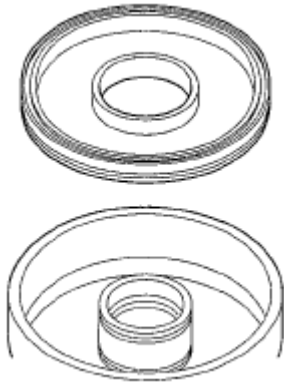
Identifying 2nd, 3rd, 4th, And 5th Clutch Drums
